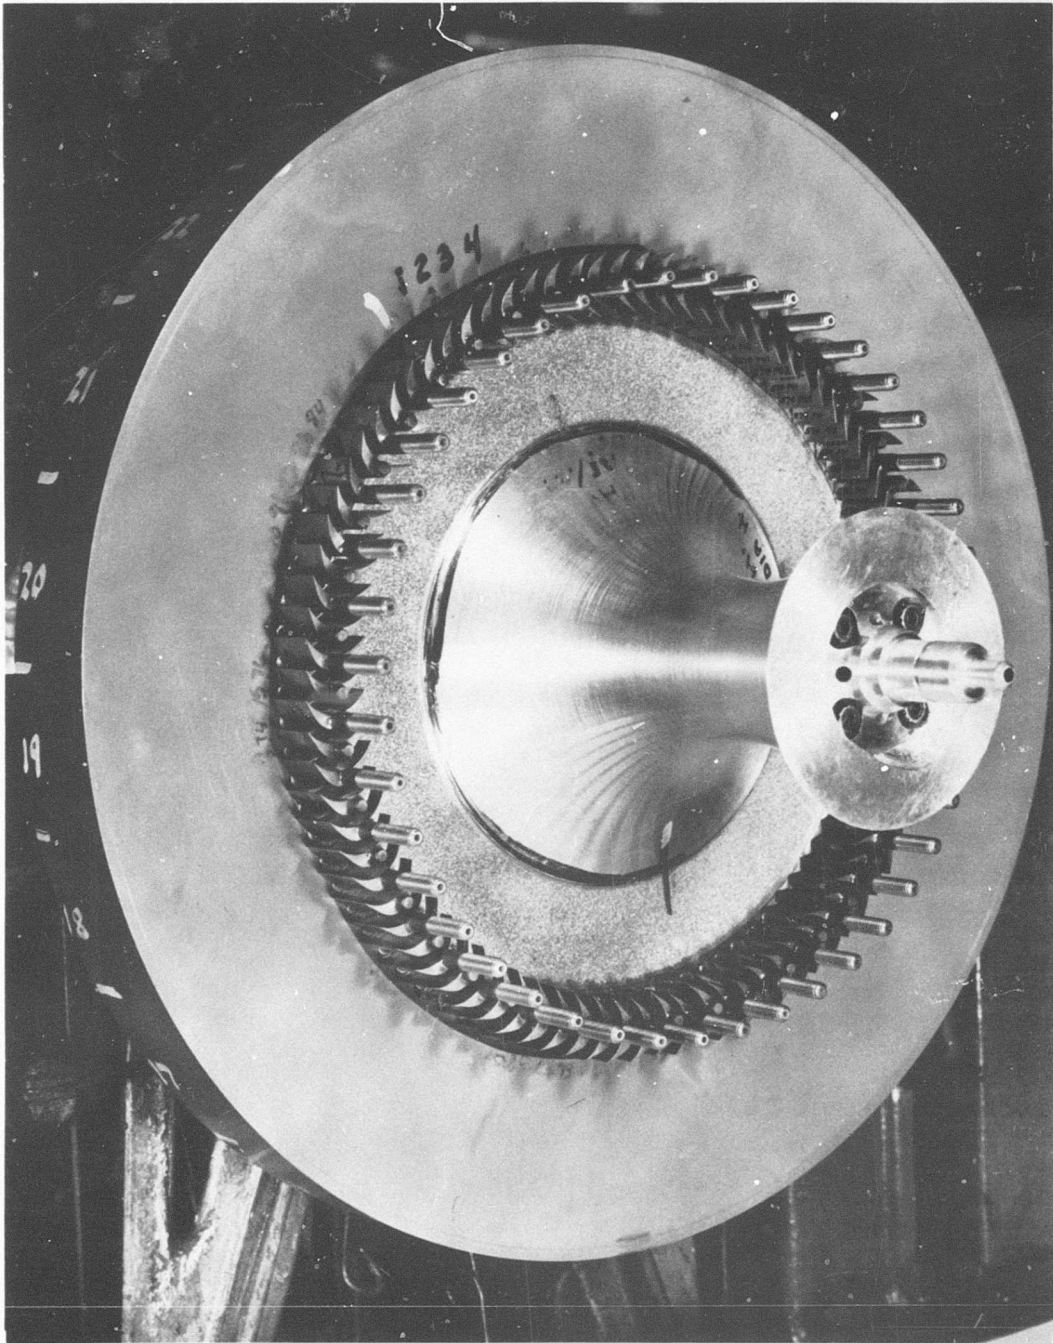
Preliminary Assembly of Rotor Disc Blades and Centerbody.
